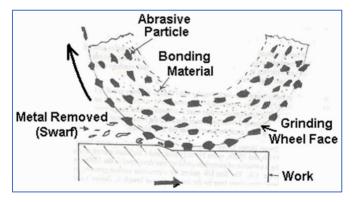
Grinding process for flat surface using a grinding wheel [14].
